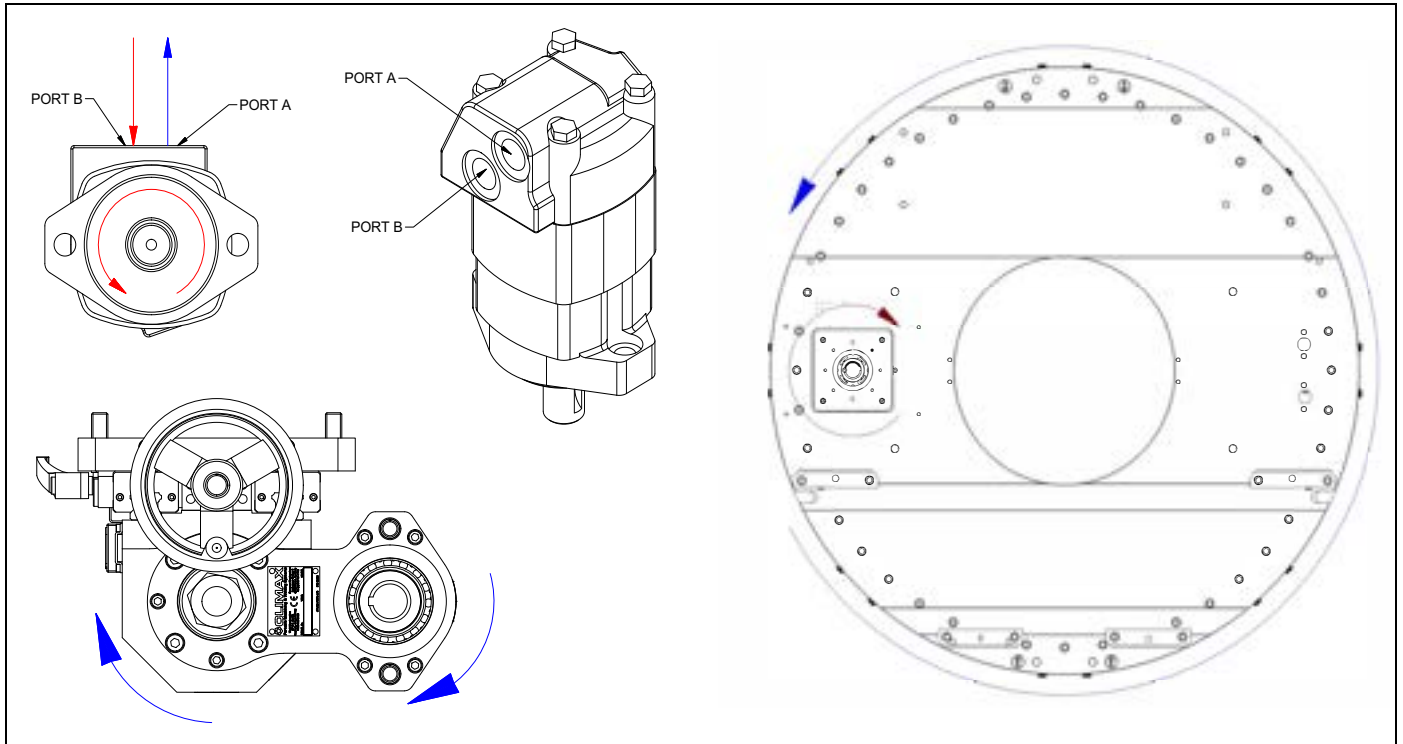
ROTATION DIRECTION FOR HYDRAULIC MOTOR, ROTATION TABLE, AND MILLING HEAD
